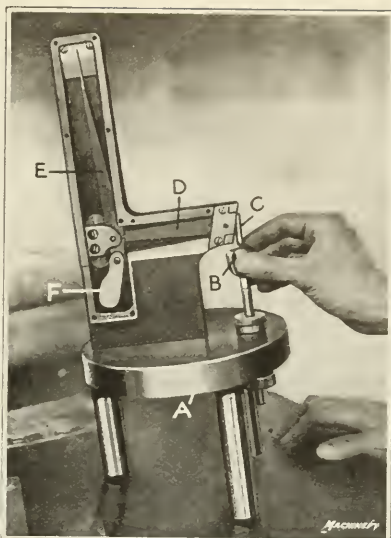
Indicating Gage shown in Fig. 60 with Plate removed to show Constructional Features
